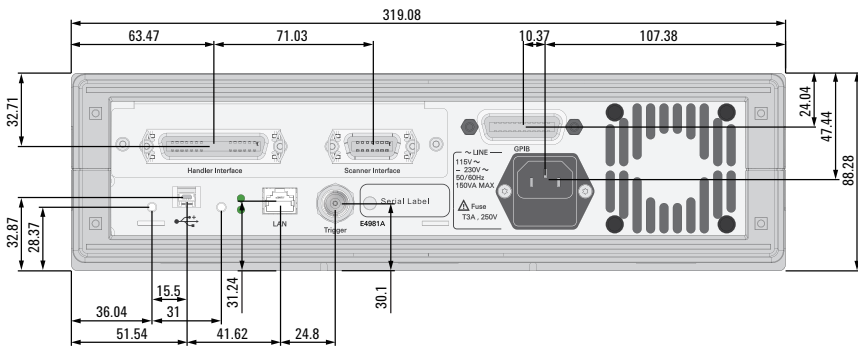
Dimensions (rear view, without handle and bumper, in millimeters, nominal)
